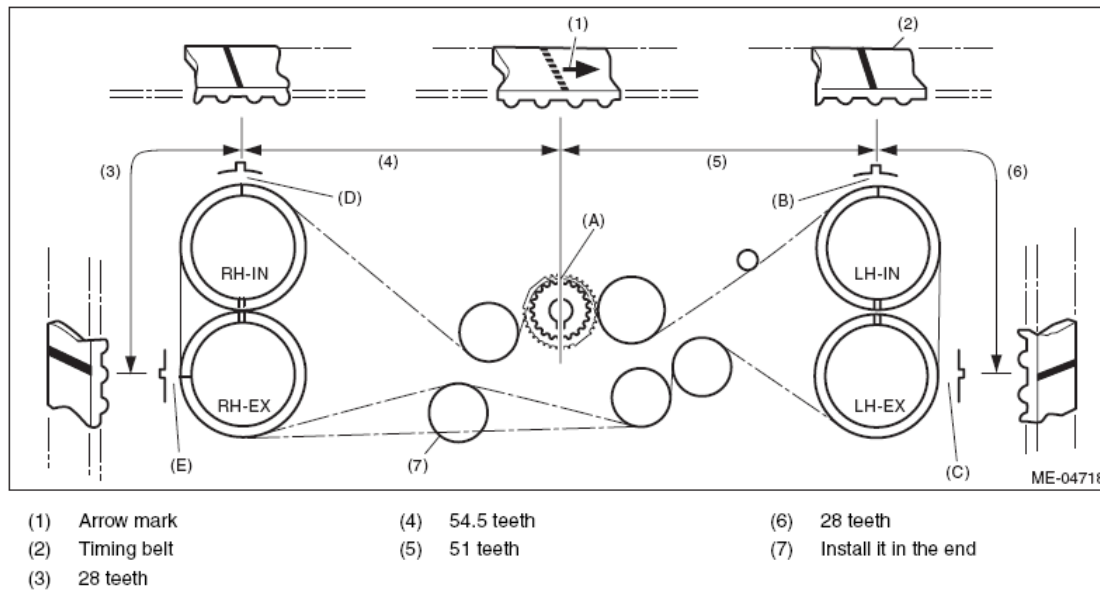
Identifying Alignment Marks On Timing Belt With Sprocket Marks
